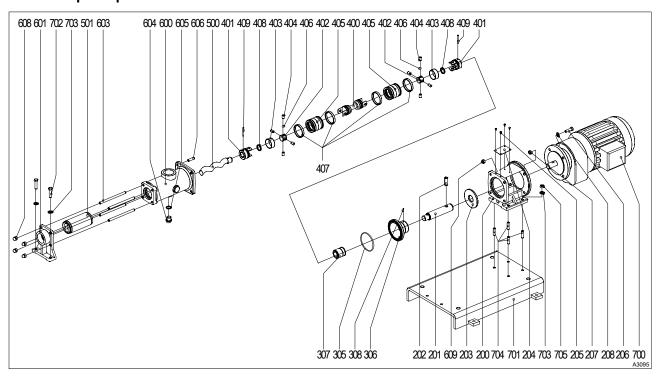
Spare parts for AFJ 15.1 / 20.1
